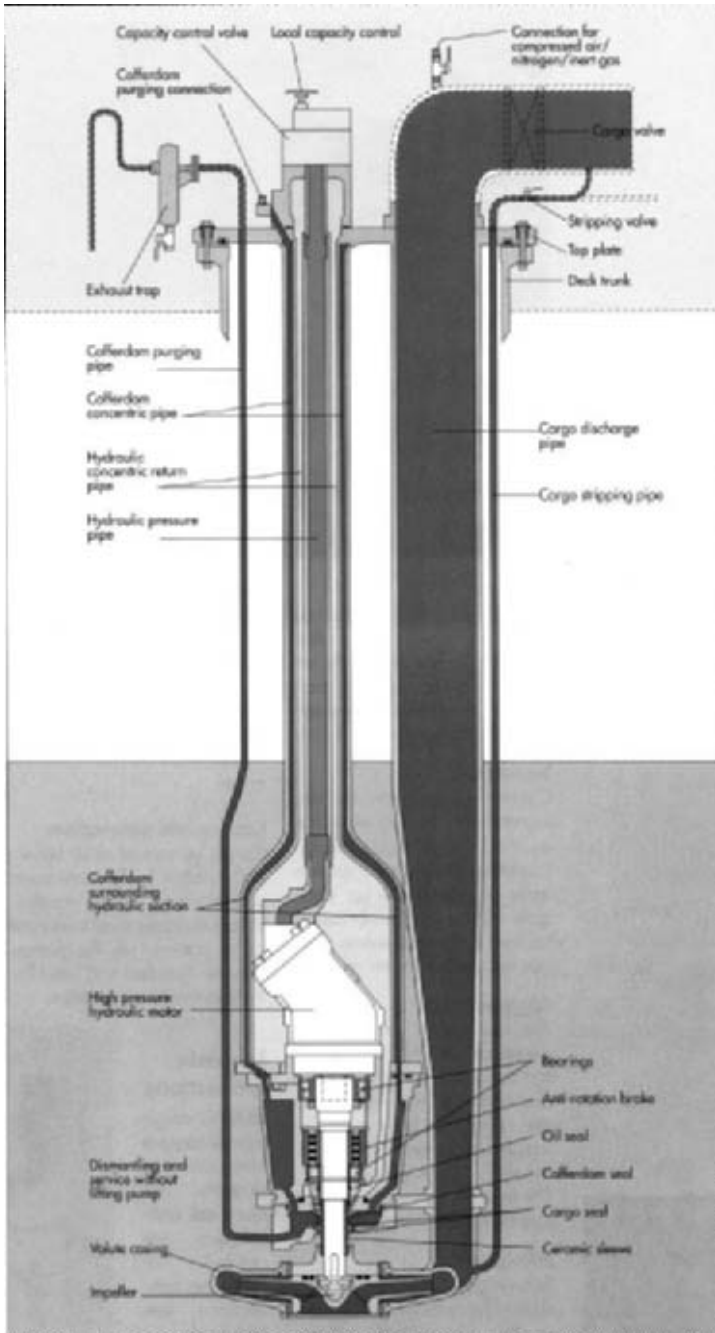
Hydraulic-motor-driven submersible cargo pump (Frank Mohn AS)
